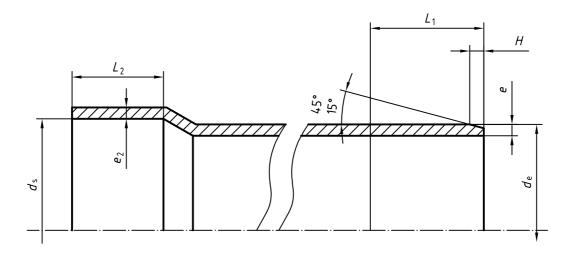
Basic dimensions of sockets and spigots for solvent cement joints
